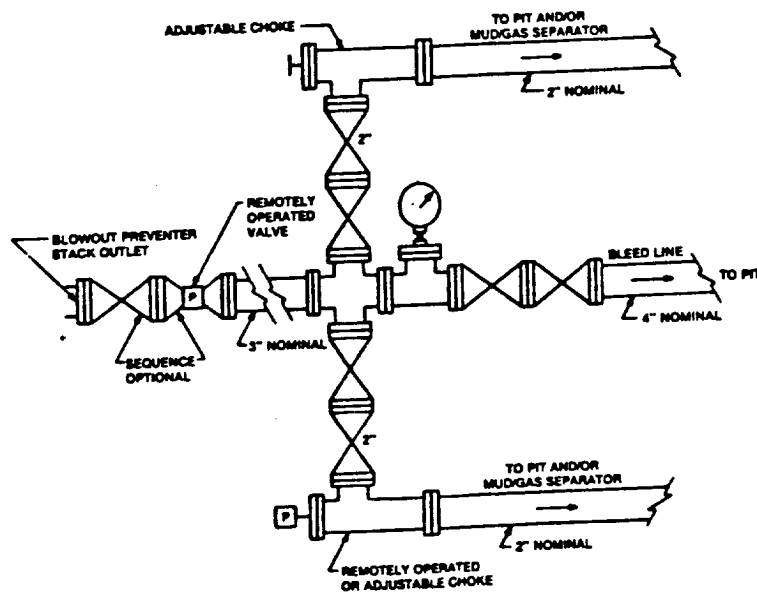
Typical choke manifold assembly for 5M rated working pressure service — surface installation.
